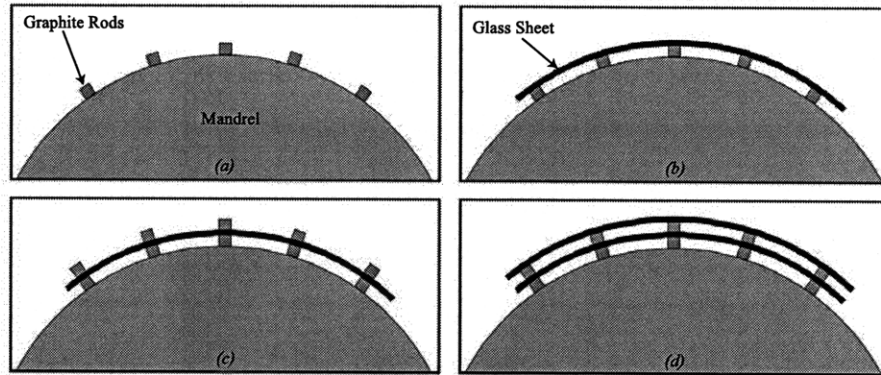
Assembly of sheet glass using the Error-Correcting Monolithic Assembly and Alignment scheme. (a) Graphite rods are bonded onto the mandrel and machined to the required shape. A thin layer of epoxy is placed on the rods (not shown). (b) A glass sheet is placed on the graphite rods such that the glass' critical, reflective surface is facing down towards the first set of rods. (c) A second set of graphite rods is bonded onto the back side of the sheet. (d) A second sheet is bonded to the rods and the stacking process is continued until the desired number of glass sheets is assembled. *Taken from Hailey et al.
